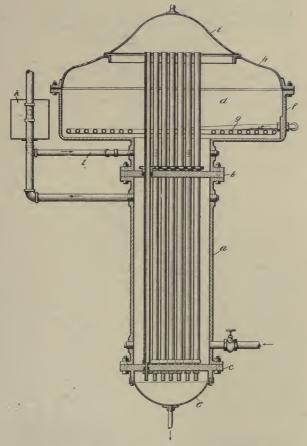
VERTICAL CROSS SECTION JEWELL STILL.
